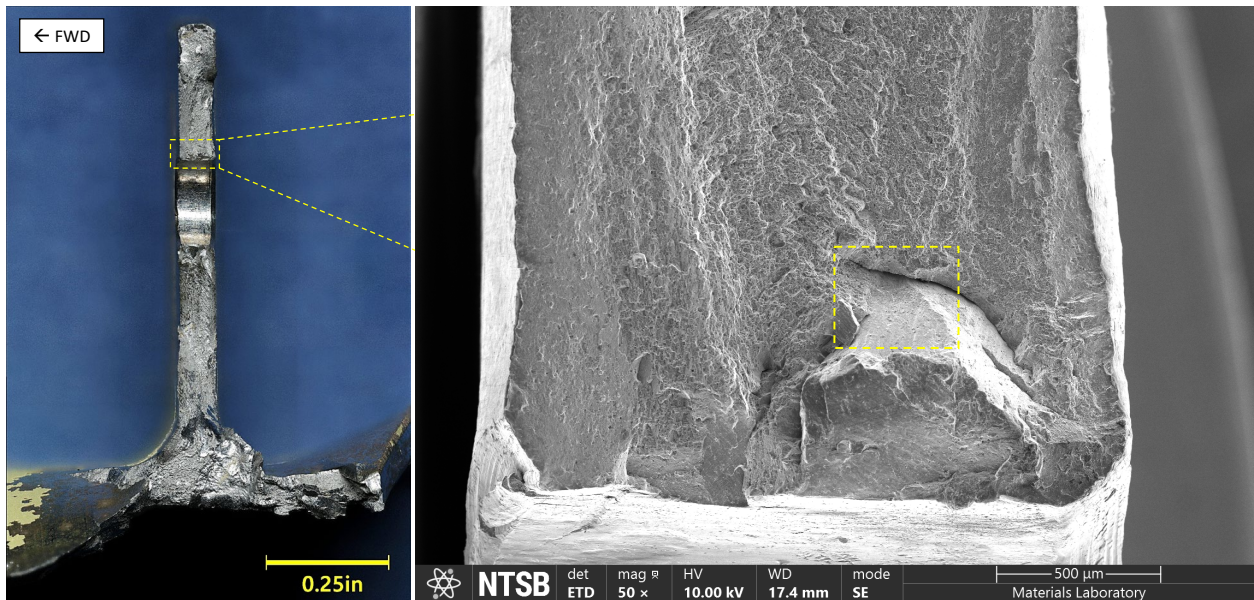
Secondary electron fractograph (right) of the lower main spar cap fracture surface (inboard fracture location) above the fastener hole showing mechanical contact damage. Shear lip features and necking deformation were observed along the forward and aft edges of the stem with a rougher central region between. The area highlighted by a yellow box in the right image was observed more closely as detailed in the following figures.
